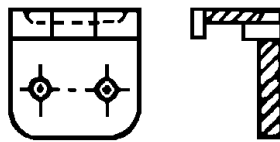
B0816028 - STRINGER TIEMOUNT/EXTRUDED SECTION - DIMENSIONAL LIMITS
